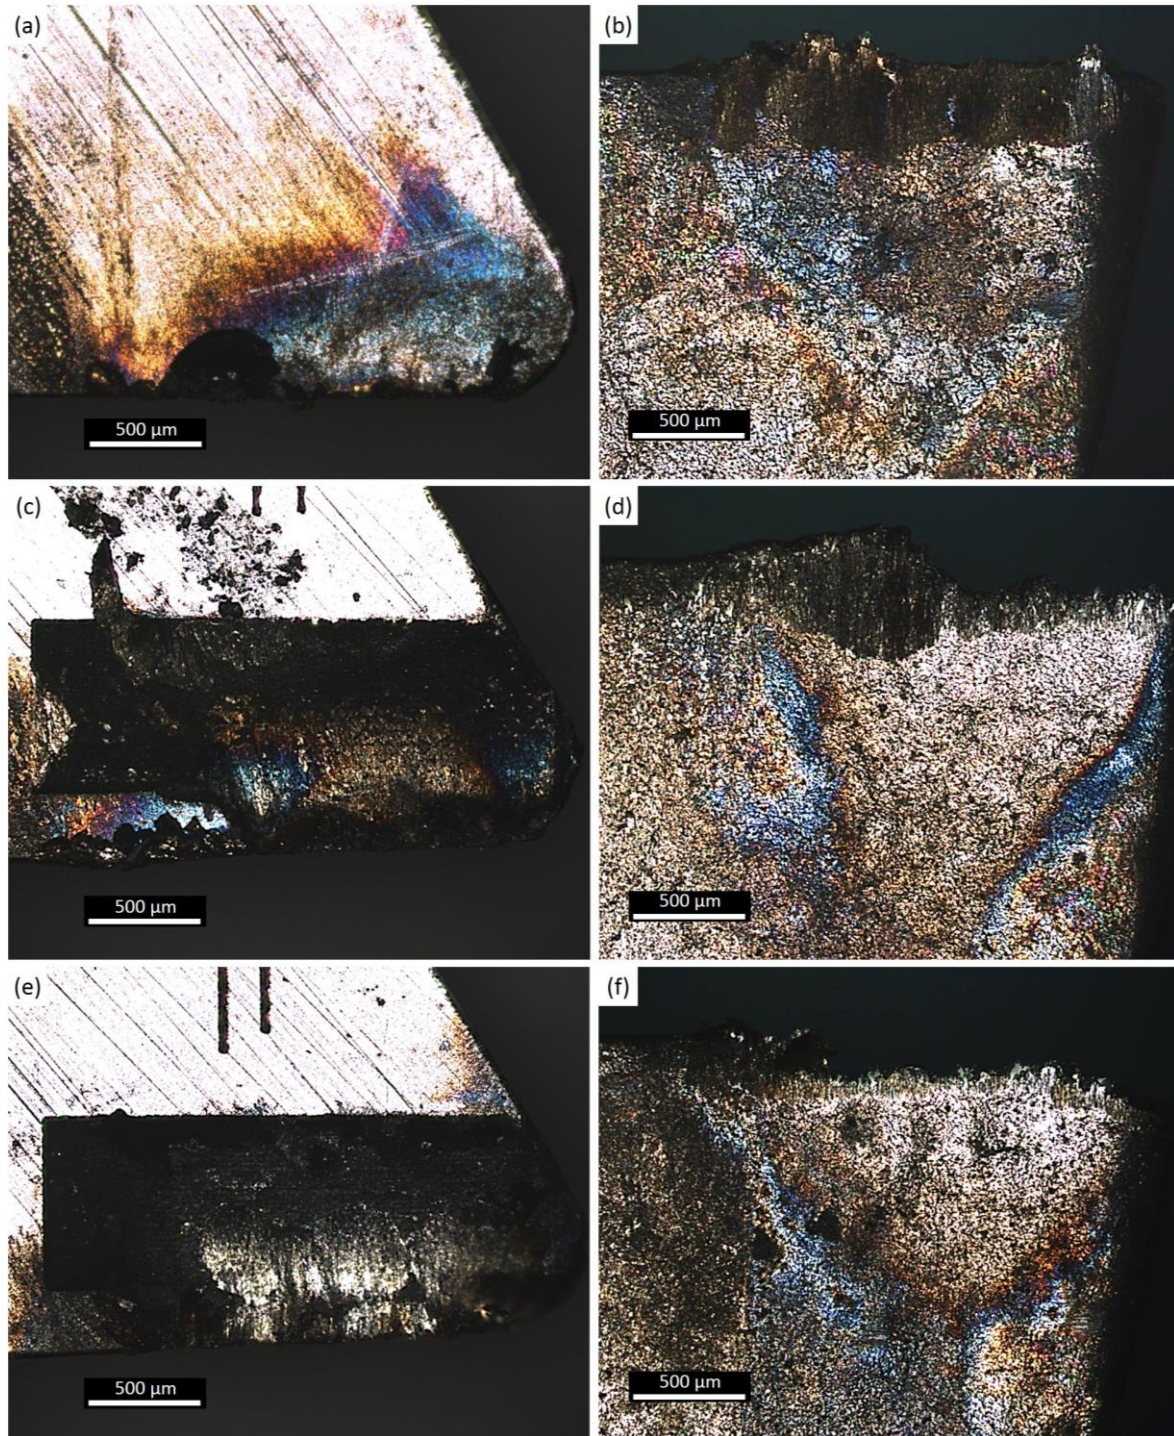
Cutting tools integrity. (a) Rake face of the reference tool; (b) Flank of the reference tool; (c) Rake face of chip-breaker model A; (d) Flank of chip-breaker model A; (e) Rake face of chip-breaker model B; (f) Flank of chip-breaker model B
